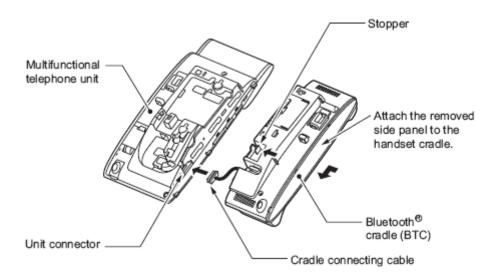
Attach Bluetooth Cradle to the Multiline Terminal
